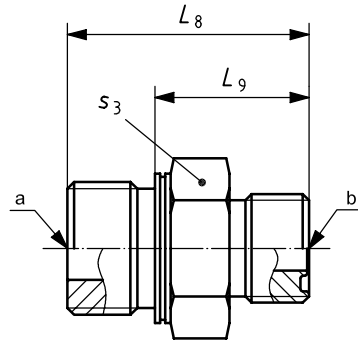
Key dimensions of port and tube sides of reducing connectors
